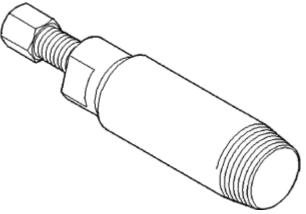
Front Crankshaft Seal Remover 6341A Courtesy of CHRYSLER LLC
